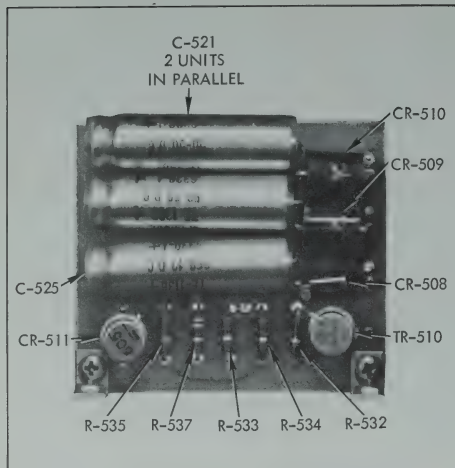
PRINTED CIRCUIT BOARD (SIDE VIEW)
